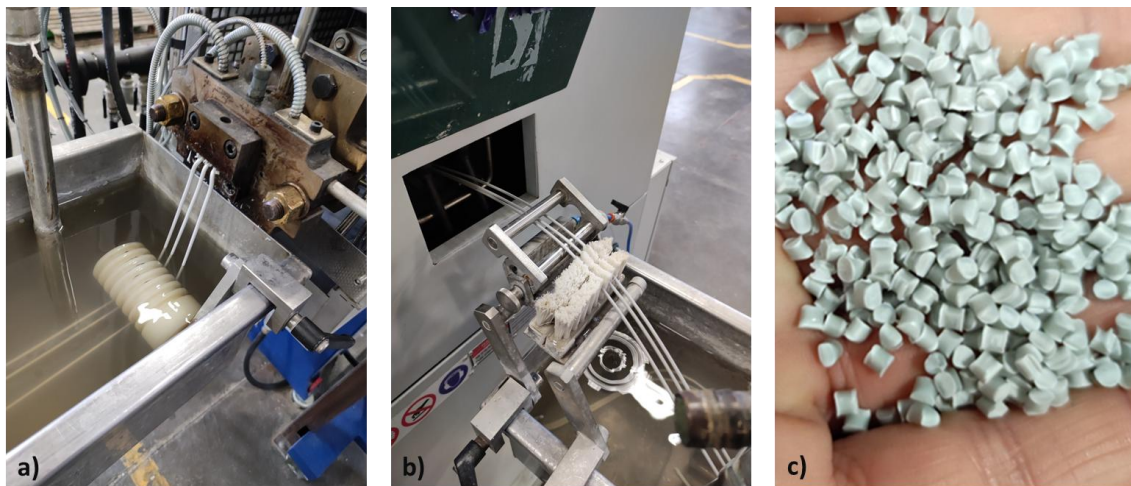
Compounding process of PLA-PHBH blends: a) strands exiting the die of the extruder, b) strands entering the pelletizer system, and c) pellets after the cut.
